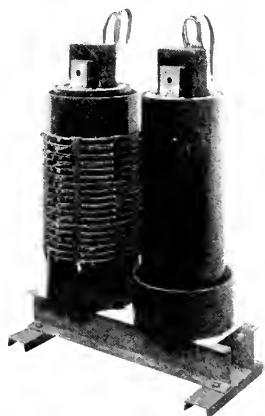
TRANSFORMER COMPLETELY ASSEMBLED EXCEPT FOR ONE COLUMN OF HIGH-VOLTAGE COILS
